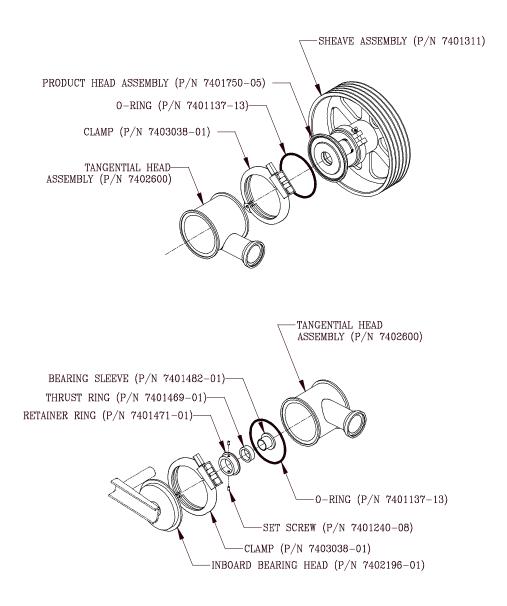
Three-Inch Diameter (76.2 mm) Tangential Product Head
